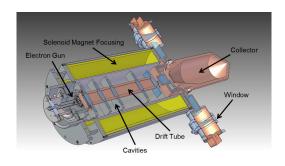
3D Mechanical Assembly of the Sheet Beam Klystron.
